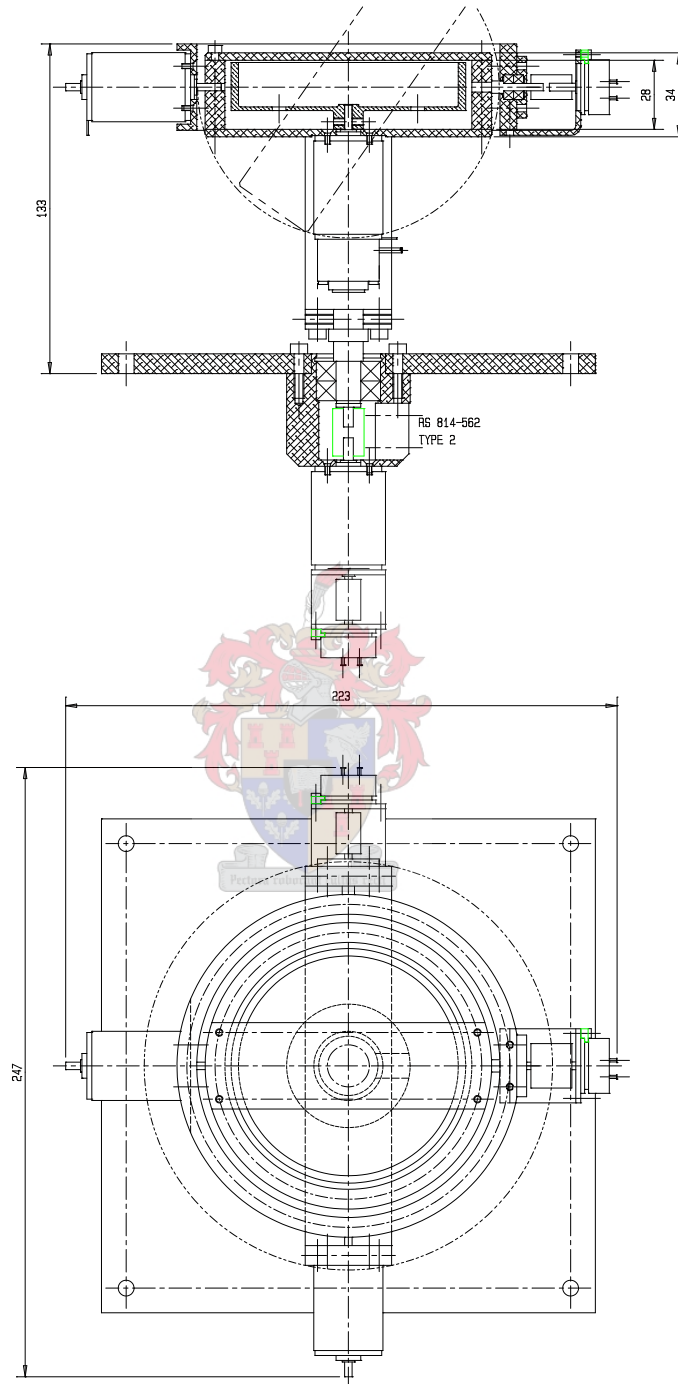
Three-degree-of-freedom gyroscope design drawing, front and top views
